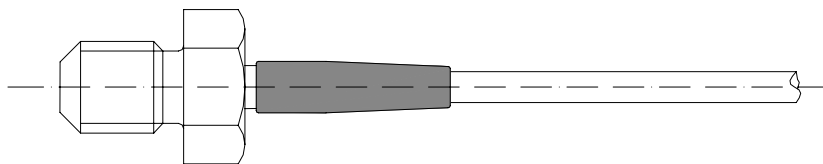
water thermoresistor – M10 thread – Rotax engines (side view)
